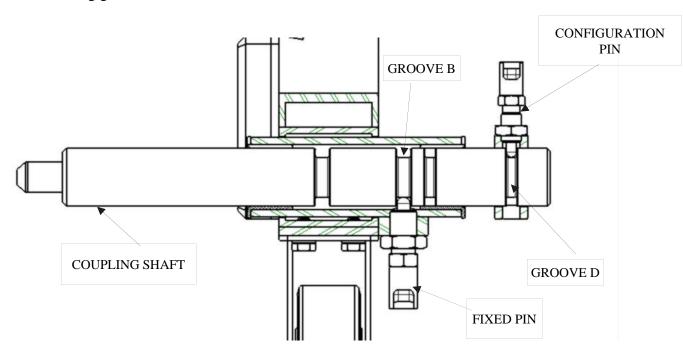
Tow Bar Assy: coupling device set for landing gear without PAD/SKI
